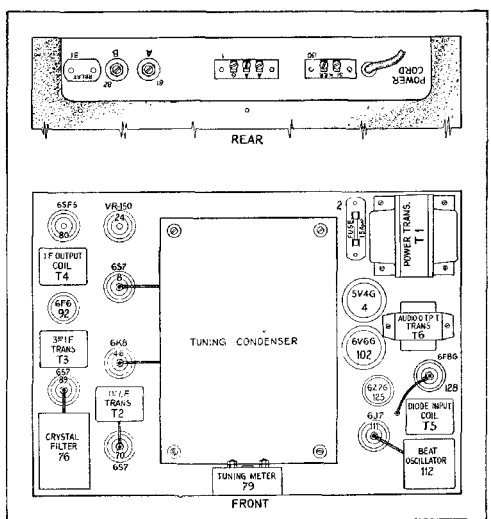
Chassis layout and meter adjustments "A" and "B."
